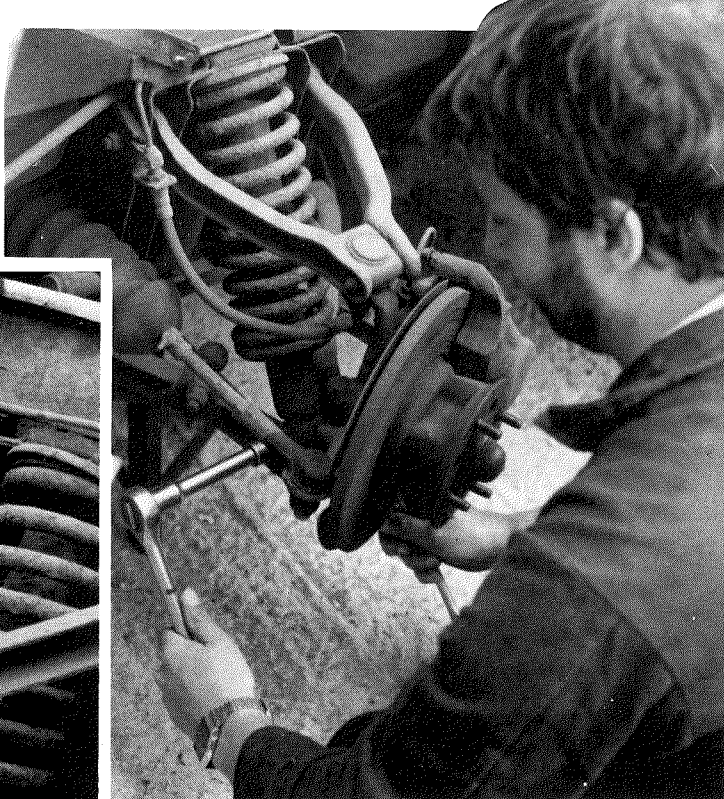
It looks like there should be enough room but if the lower trunnion bolt isn't removed, the top spring pan bolts foul on the turret making it impossible to remove the spring/damper unit cleanly.
